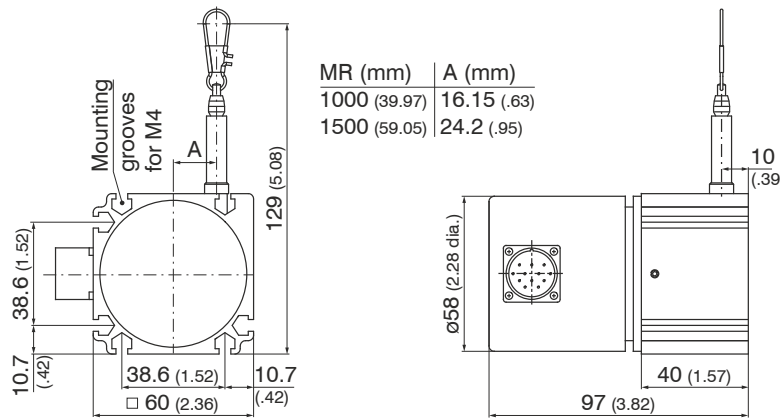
Dimensional drawing ... - FD60 - CR - SSI, dimensions in mm (inches), not to scale
